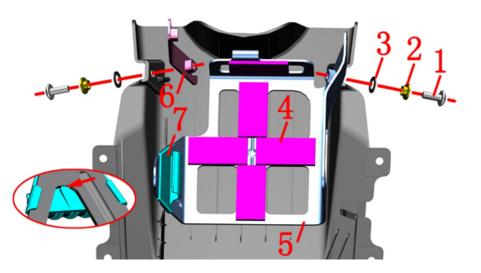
REAR COVER		Electric device box component 2	CHK	(0)
